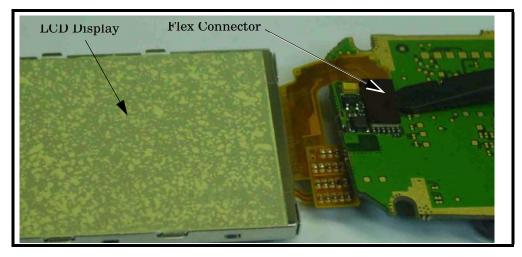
Disconnecting the LCD Flex Connector from the Transceiver Board
